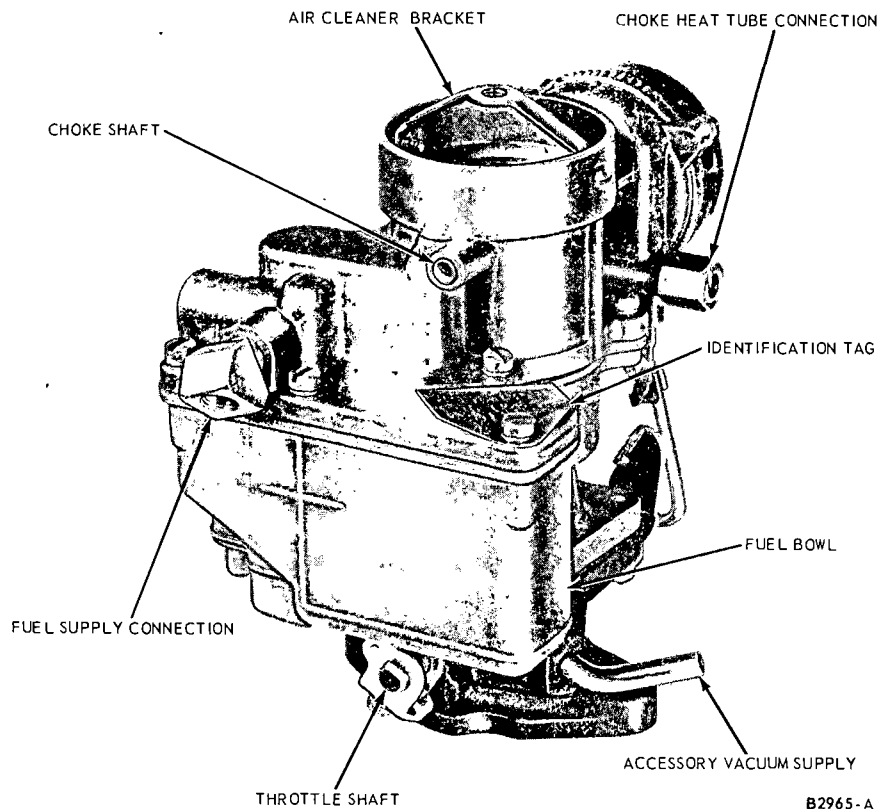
Carter Model YF 1-V Carburetor — Left Front View
